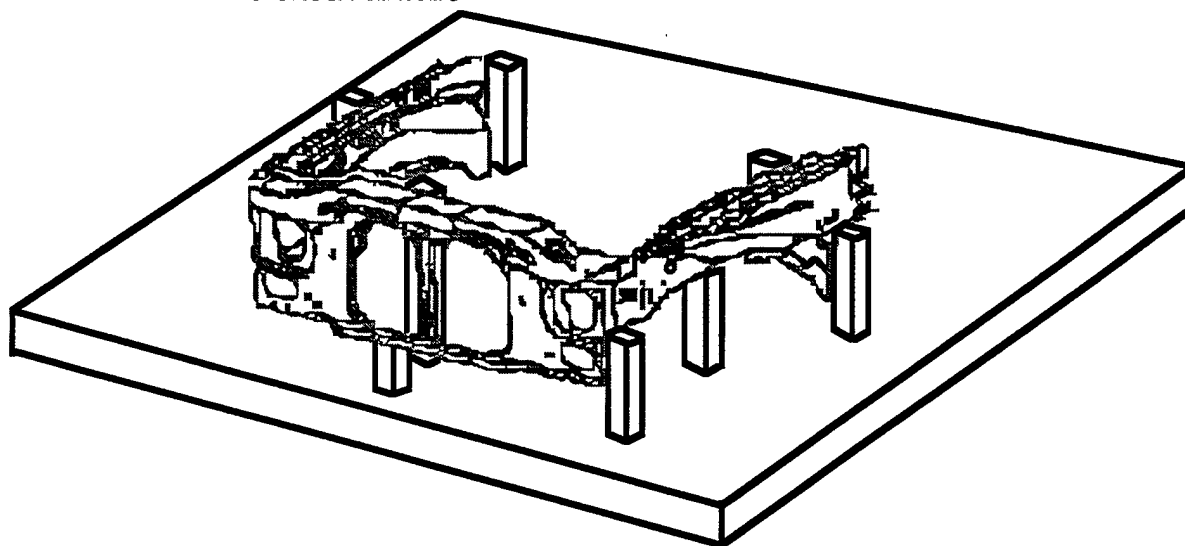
Schematic of a Blue Buck holding parts of the frame.
